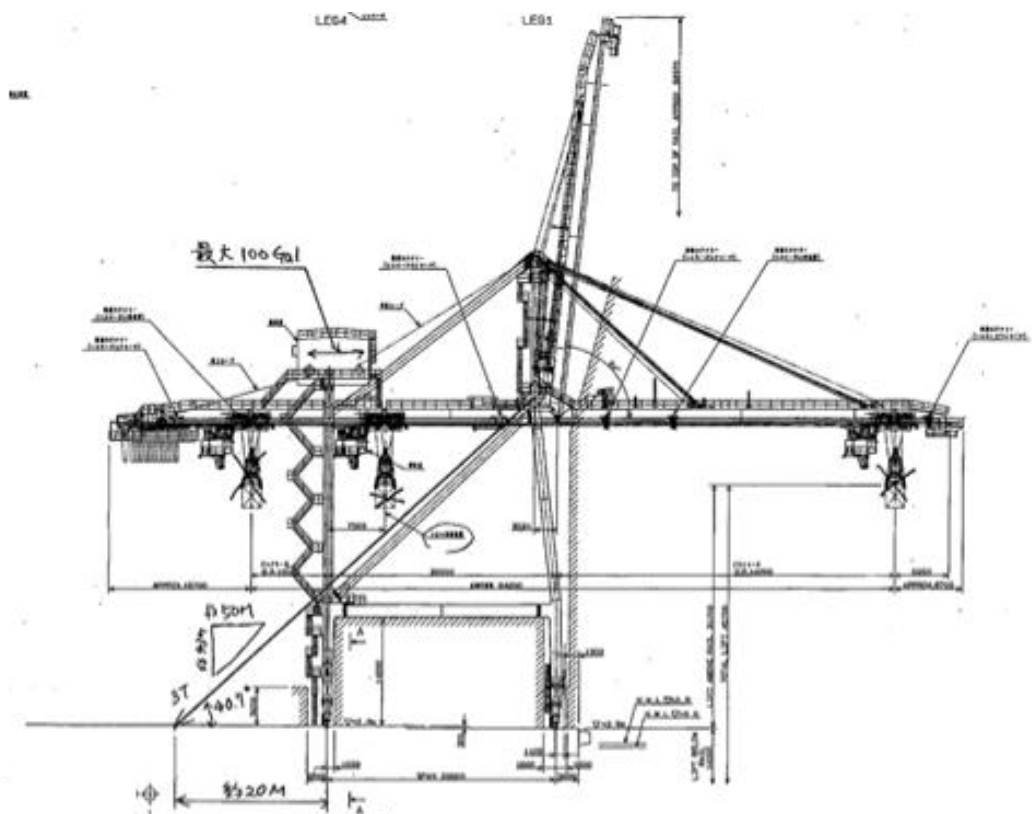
Schematic of arrangement of the testing device and its connection to a container crane
